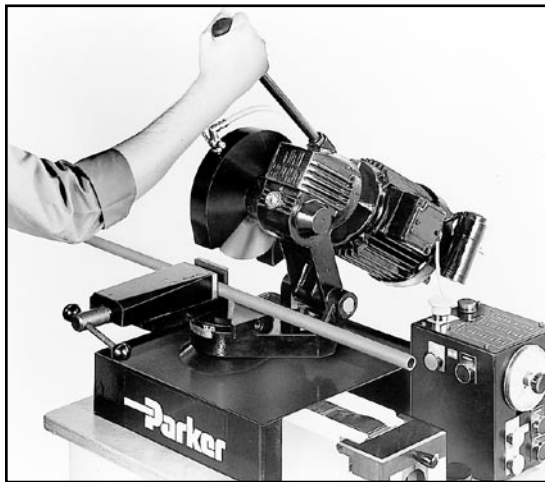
Cut-off Saw on Parker's TP432 or TP1025 Tube Preparation Center
